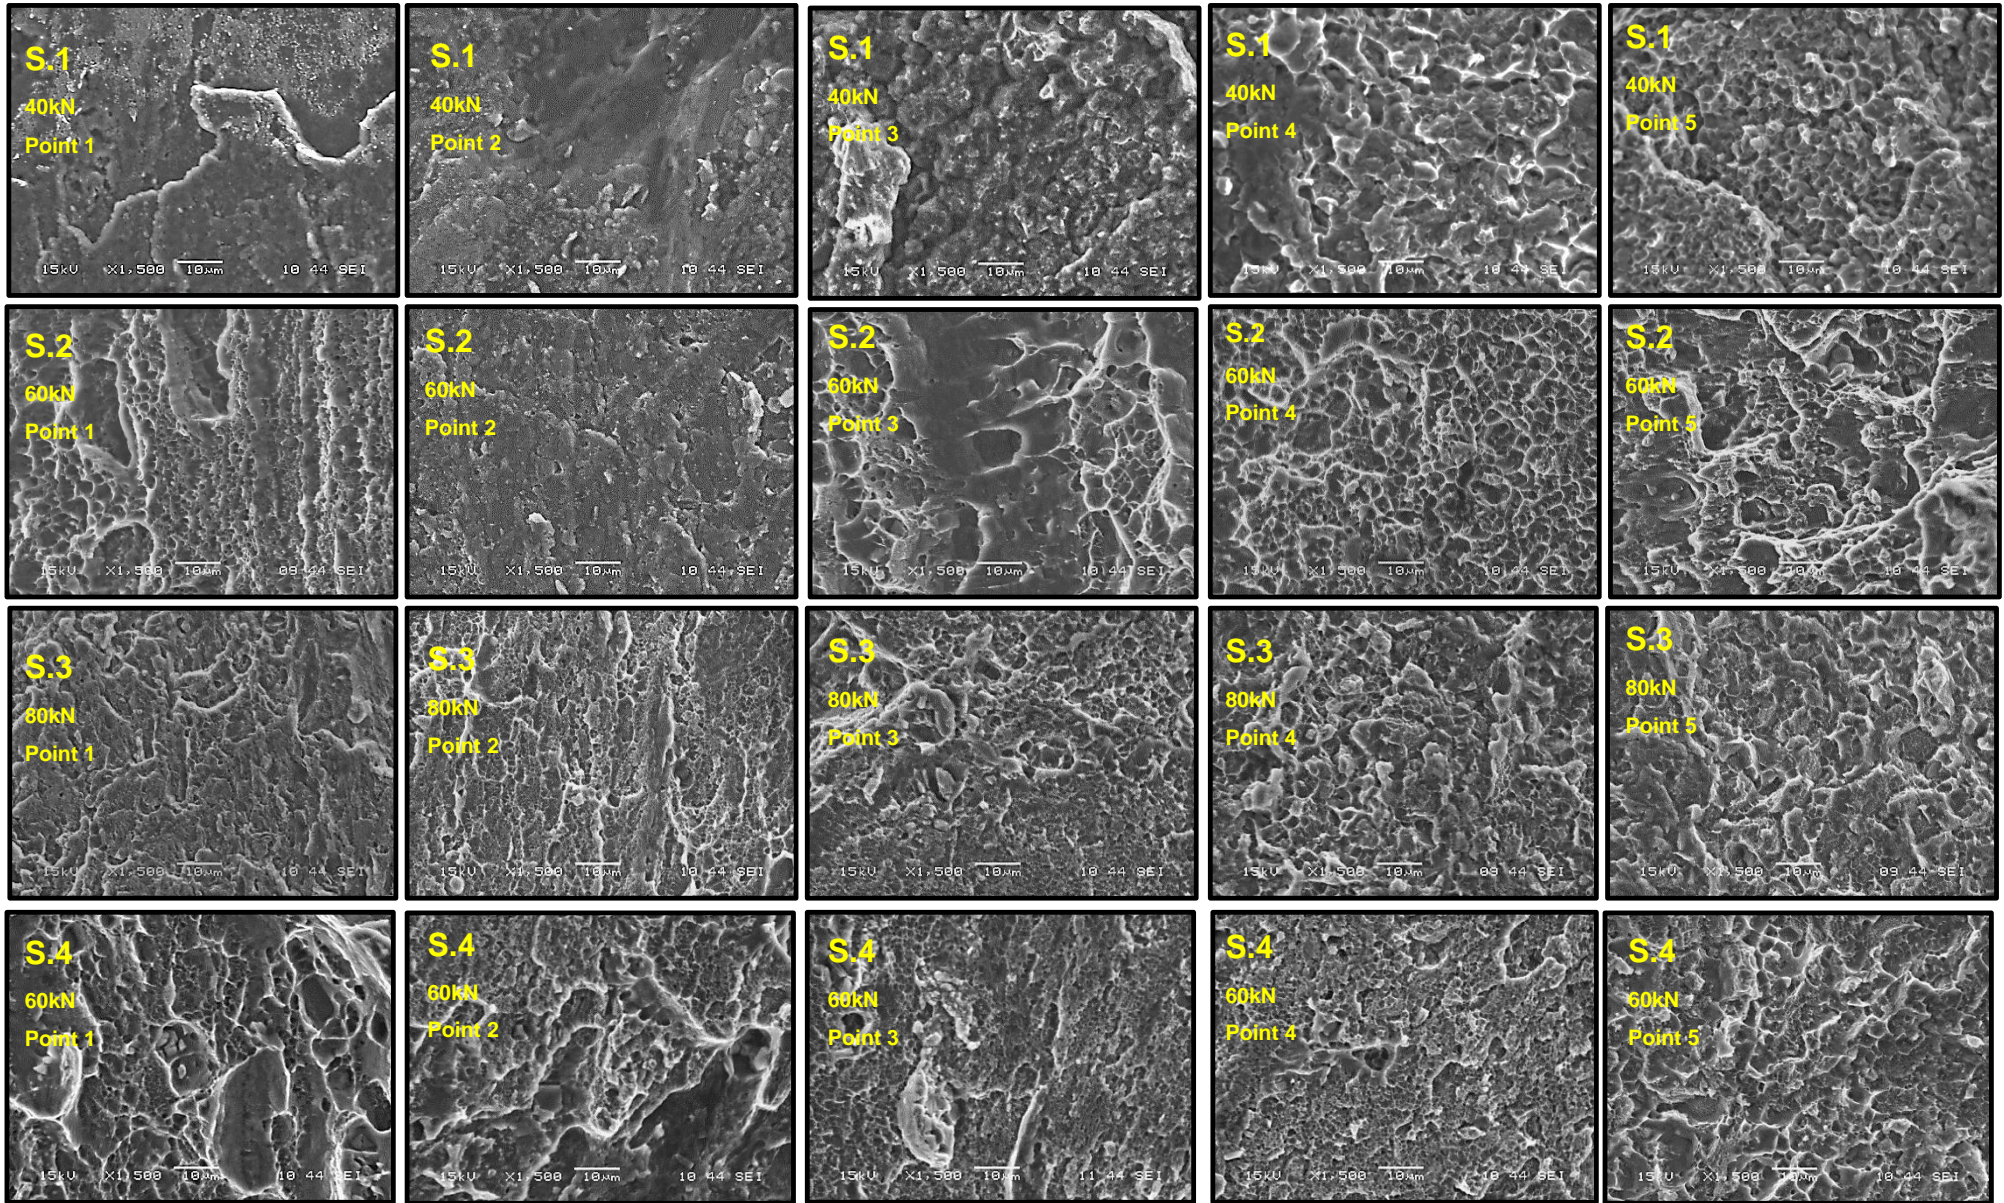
SEM Fracture Surfaces of Welds S.1 to S.4
